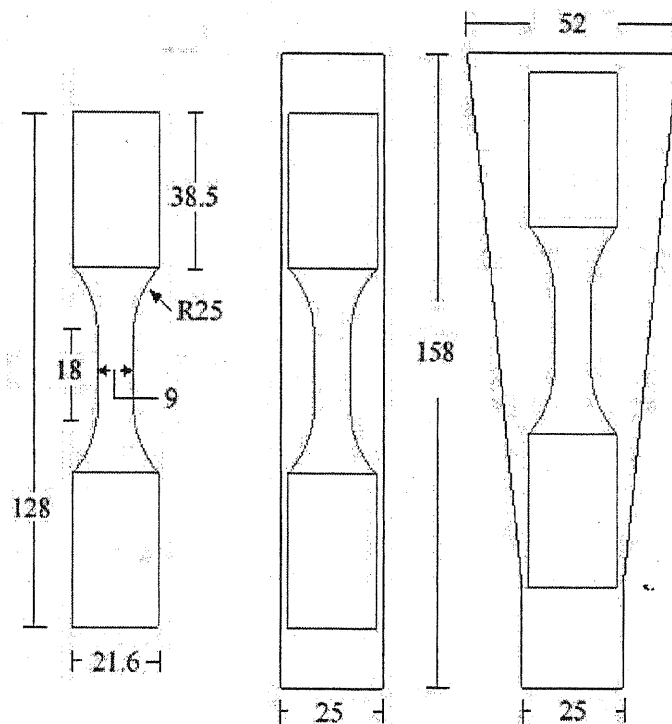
Dimensions in mm of test specimens and as-cast cylinders and truncated cones
